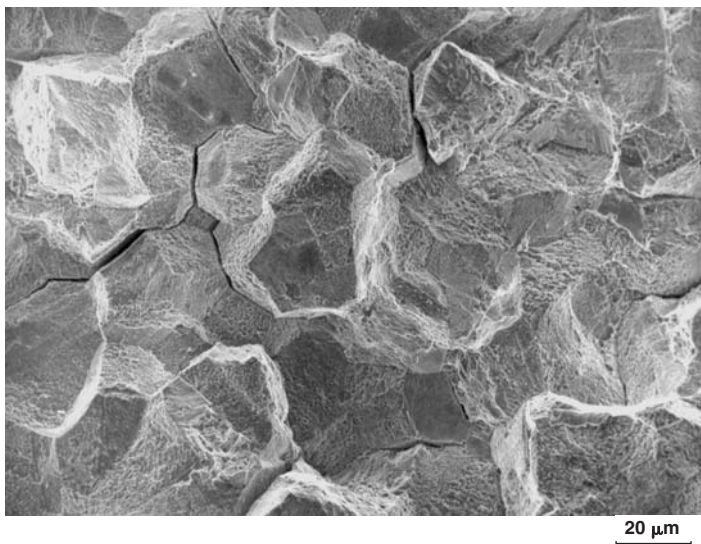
SEM fractograph of the failed blade, showing intergranular fracture
